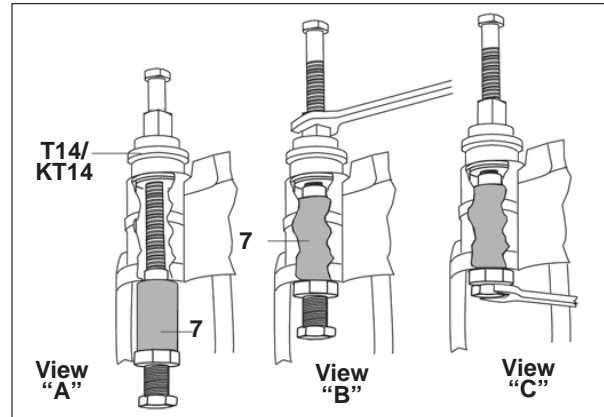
VIEW "A" AND "B": DRAW THE BRASS BUSHING INTO POSITION. VIEW "C": LOCK THE BUSHING INTO POSITION
